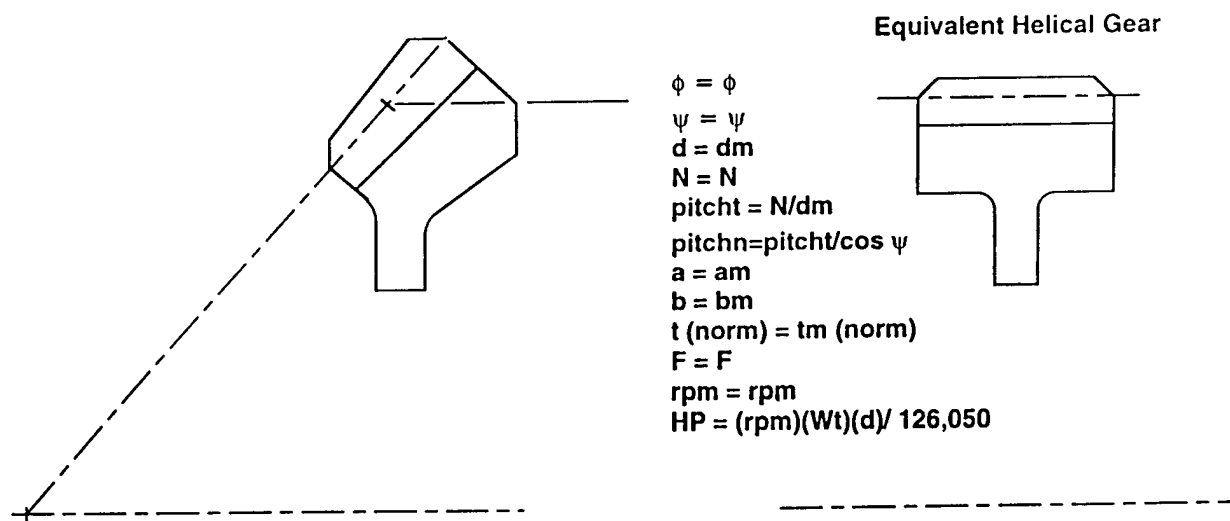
Conversion for Bevel Gear to Equivalent Helical Gear
